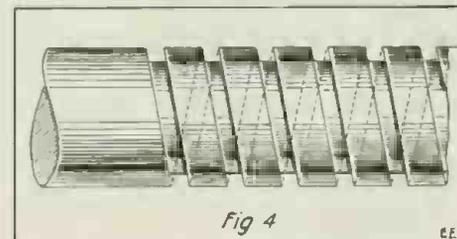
A View of a "Double Square Thread" Being Cut on Round Stock With Only the First Thread Cut. When the Second Thread is Turned on the Stock, It Will Come In Between the Convolutions Here Shown, Thus Completing the Double-threaded Screw.
